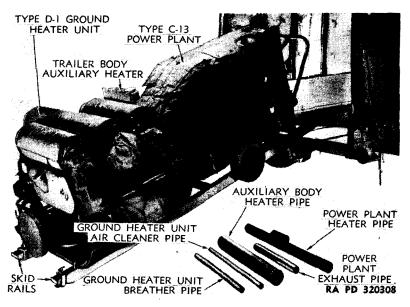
Installing Aircraft Engine Heater and Booster Unit
